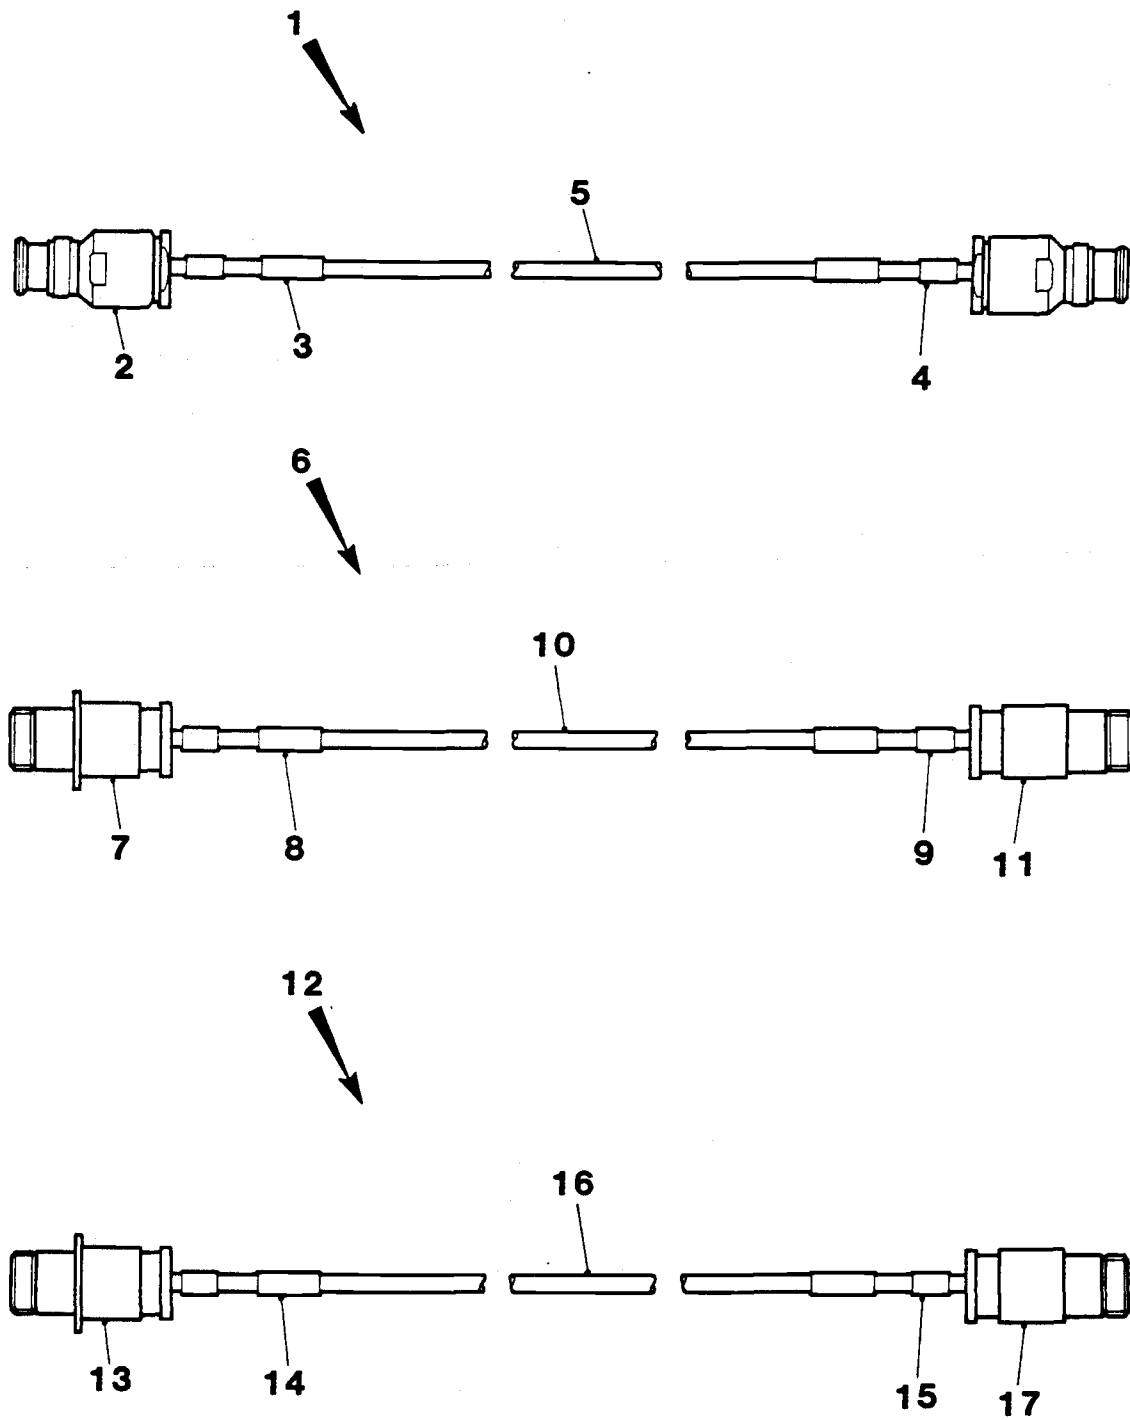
Box Antenna Mounting Assembly - Cable Assemblies
